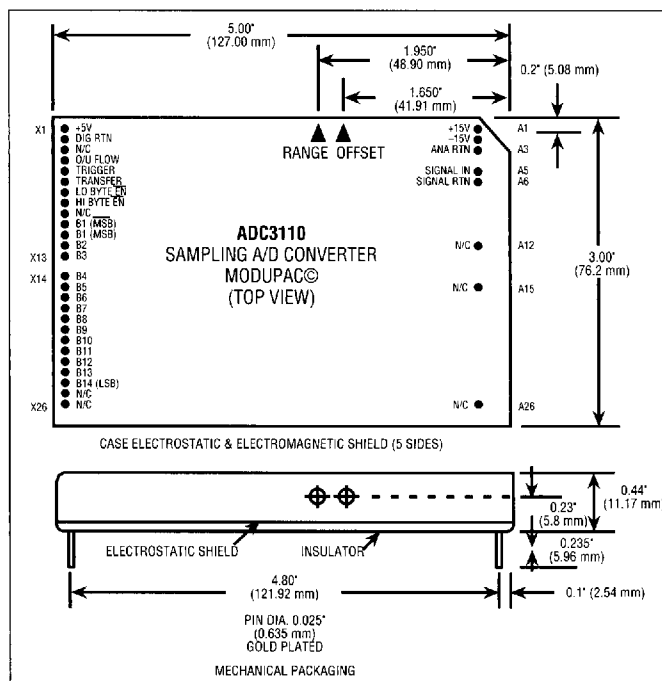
ADC3110/ADC3111 Outline Drawing and Pinouts.
